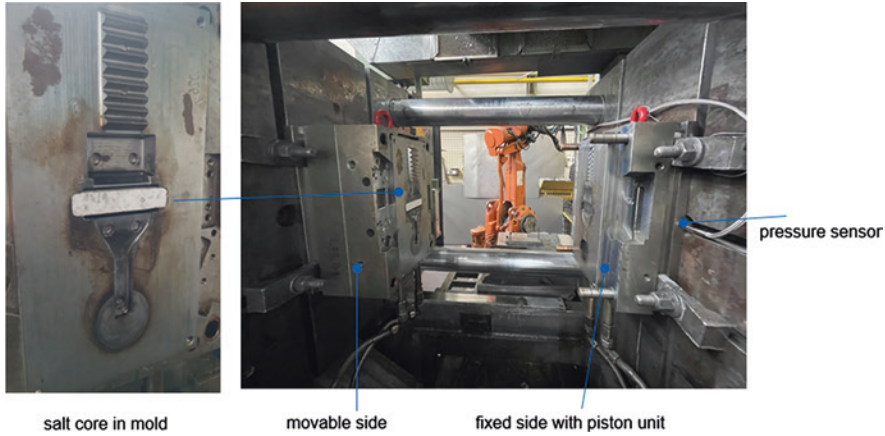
HPDC experimental setup. Left – a salt core is inserted into the movable side of the mold. Right – the casting tool is installed in the cold chamber machine
